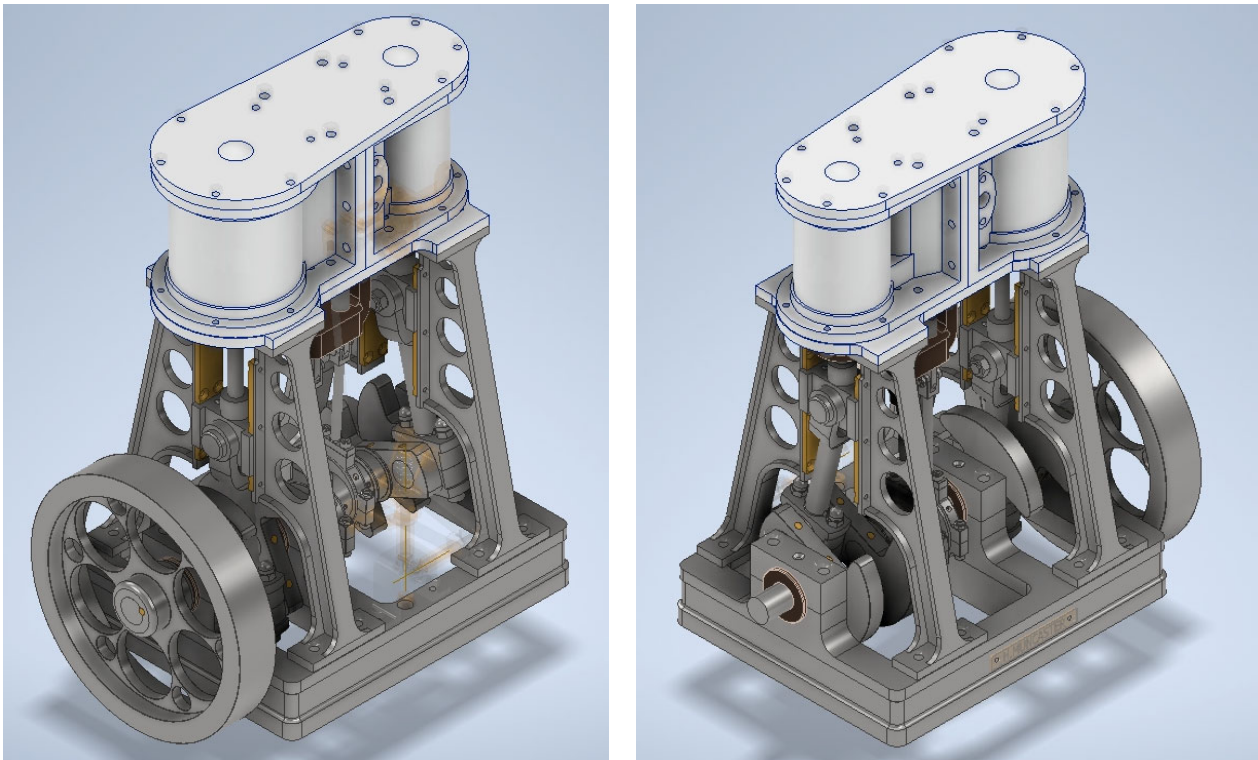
Isometric views of the simplified assembly: front view (left) and rear view (right).
